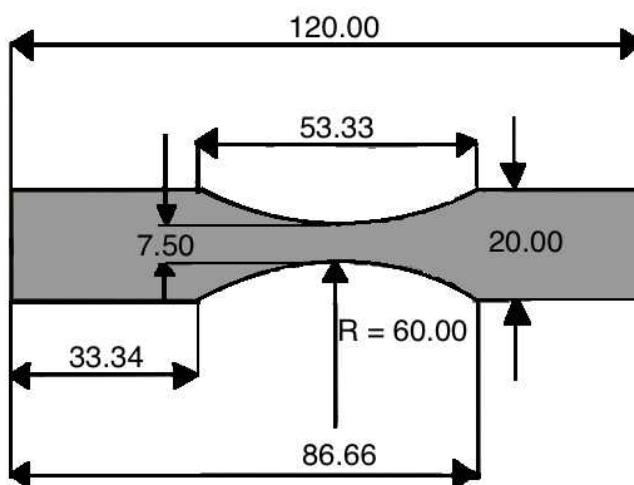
Tensile and fatigue testing specimen designed by ASTM E466.
